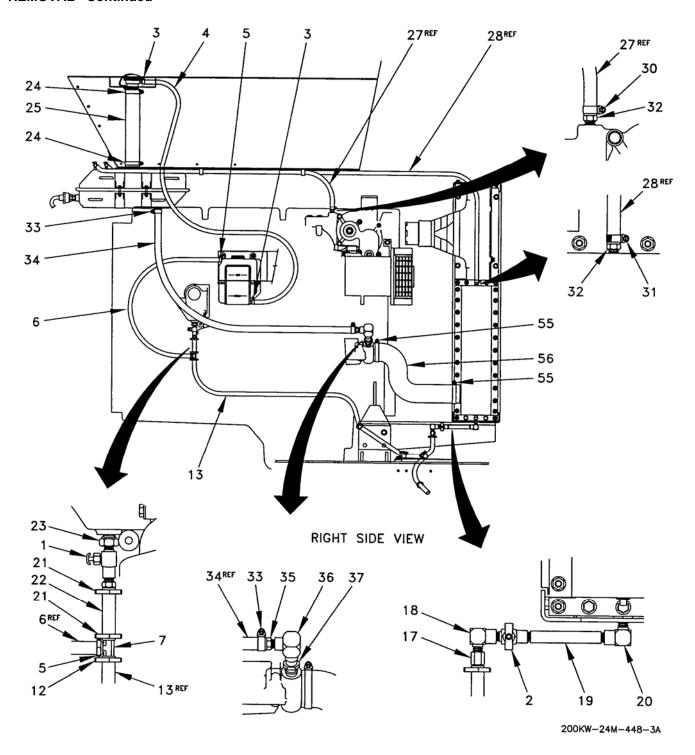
Coolant Hose Assemblies (Sheet 3 of 4).
